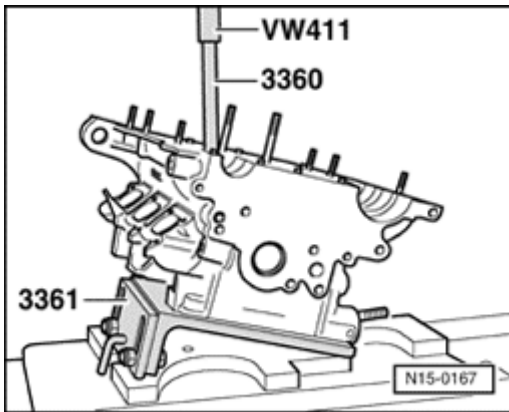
Pressing Out Worn Valve Guides Using Drift 3360
